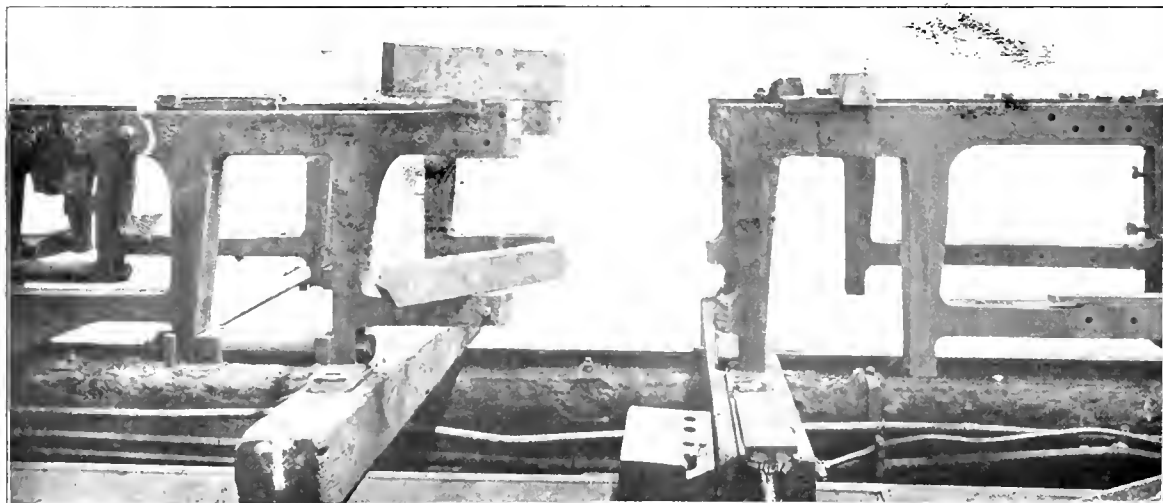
The Frames Ready for Welding In the Additional Material Between the Second and Third Drivers
